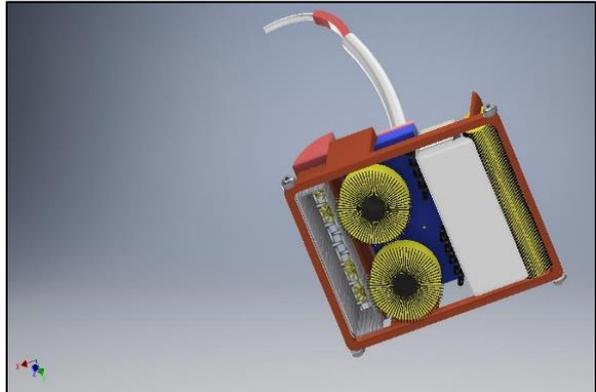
(B): Bottom View of the New Floor Cleaning Machine
